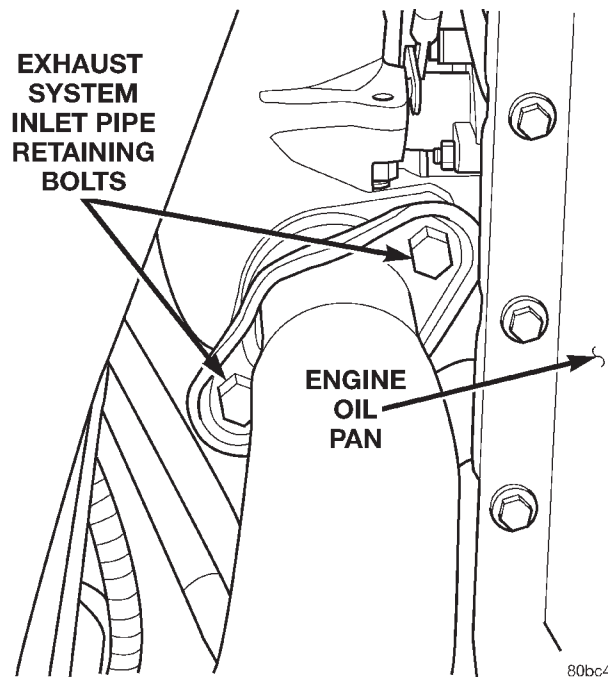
Exhaust System Inlet Pipe Retaining Bolts
